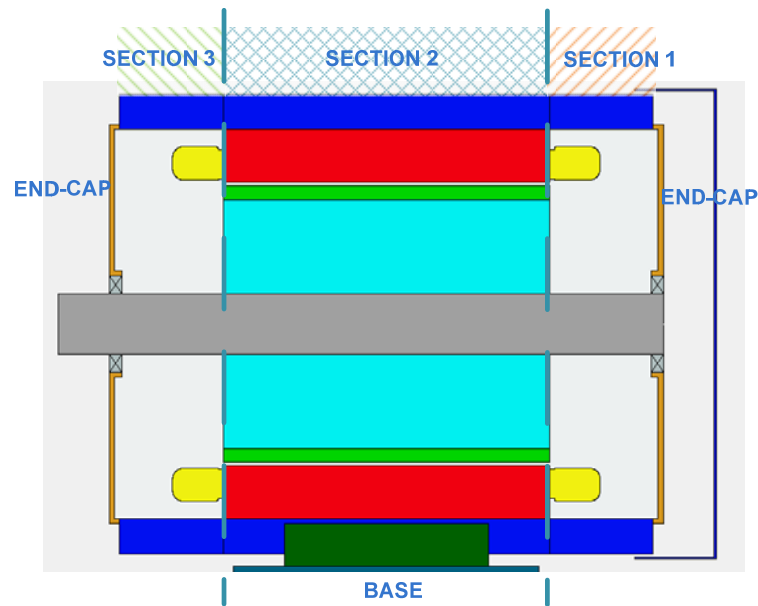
Side view of the machine. Image adapted from [Mot. 2012].
